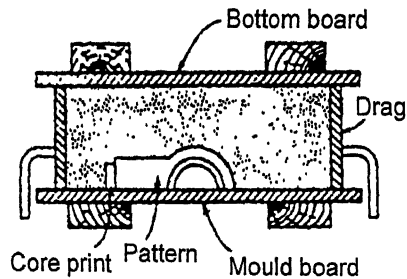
Drag half of mould made by hand. Drag is ready to be rolled over in preparation for making the cope.
